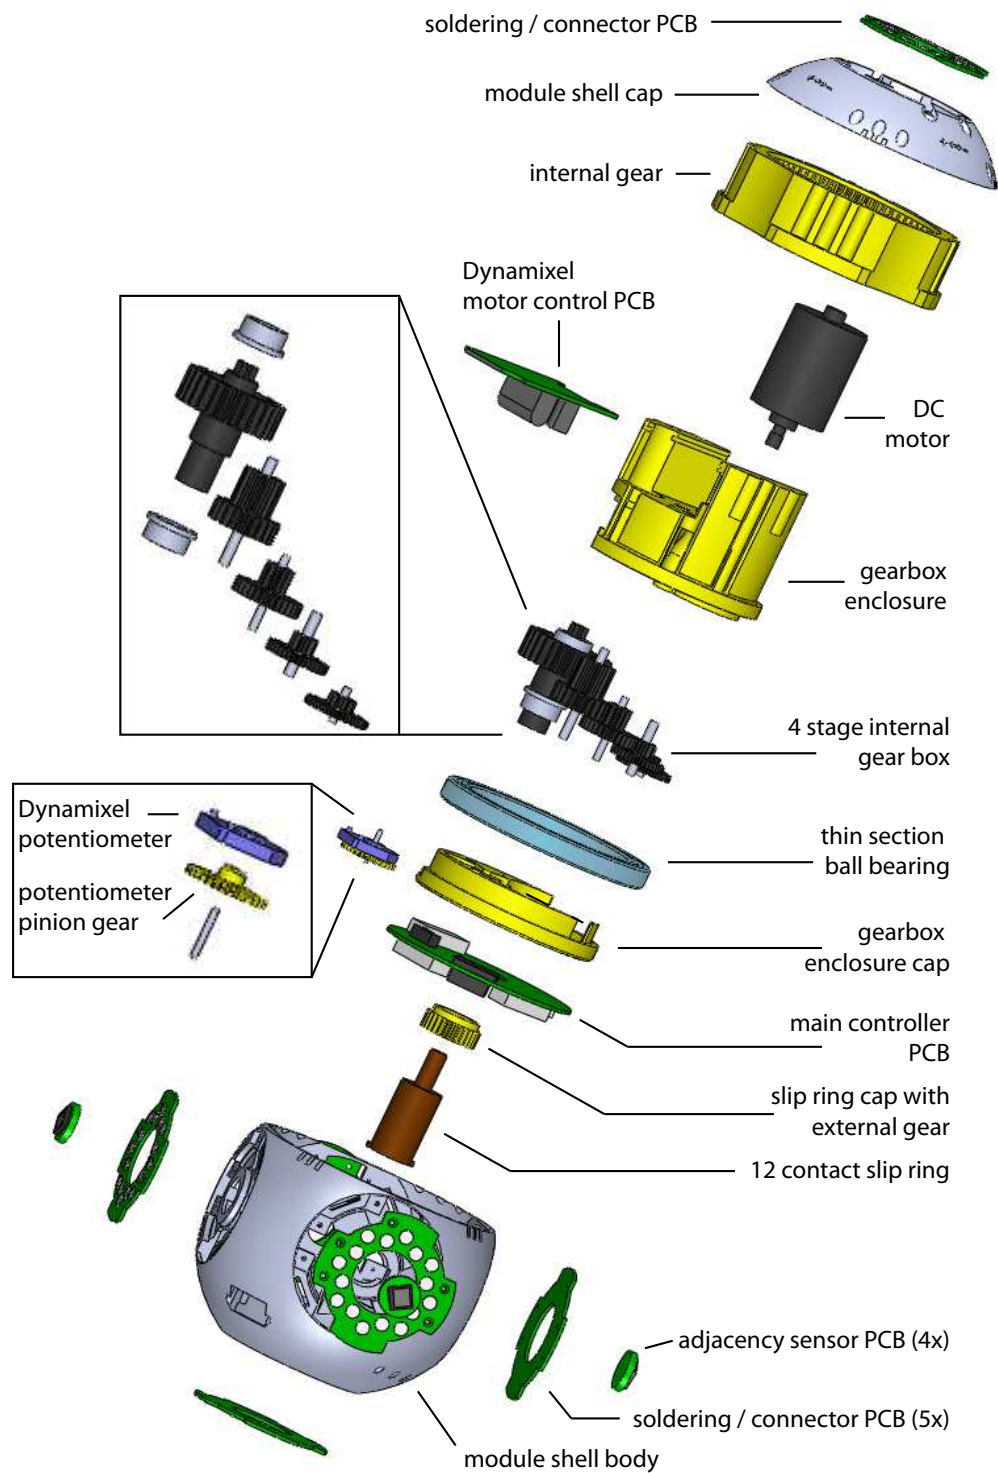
Exploded view of Soldercubes actuation module. Fasteners, magnets, and wires omitted for clarity.
